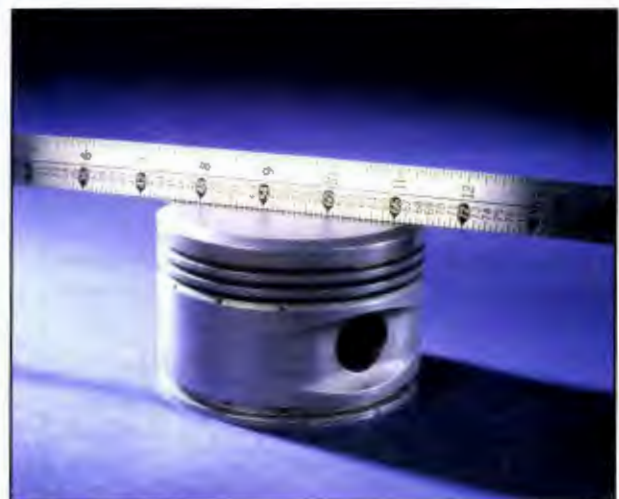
Use a straightedge and thickness gauge to check the flatness of a piston head. The presence of a depression in the top of a piston head may indicate damage from detonation and could be cause for rejection.
